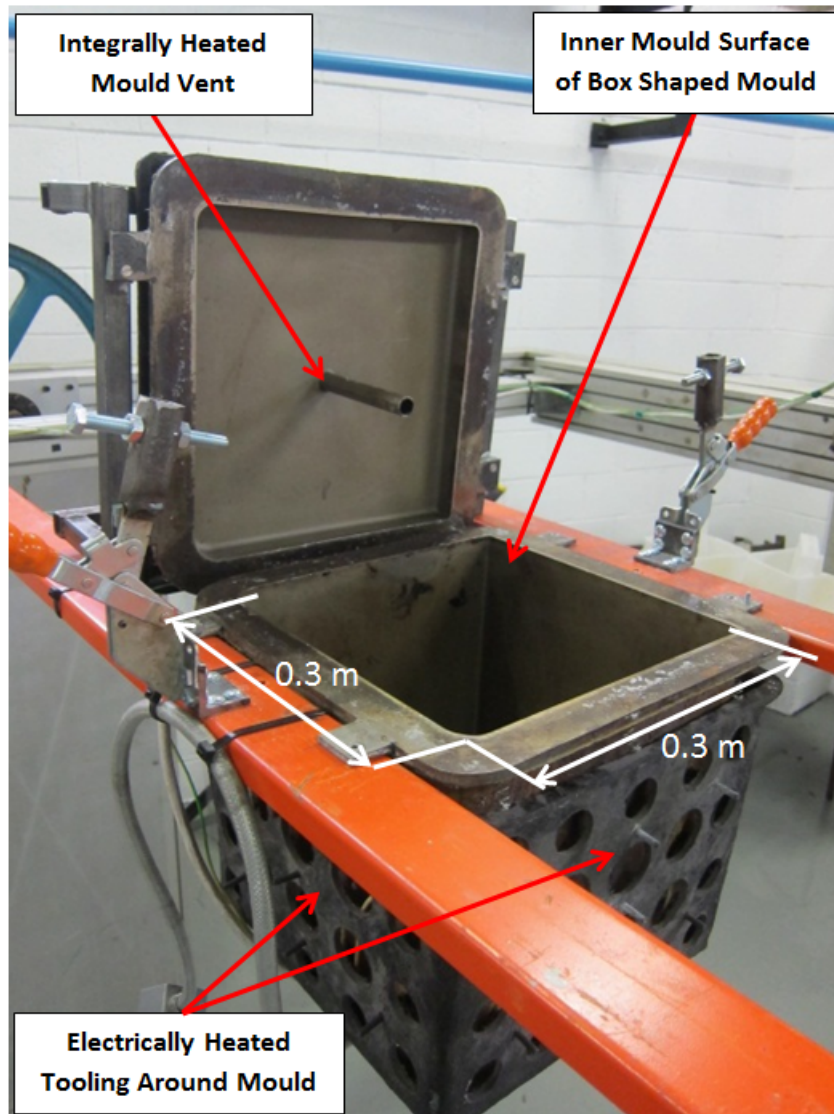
Photograph of the electrically heated mould tooling for the box-shaped mould.
